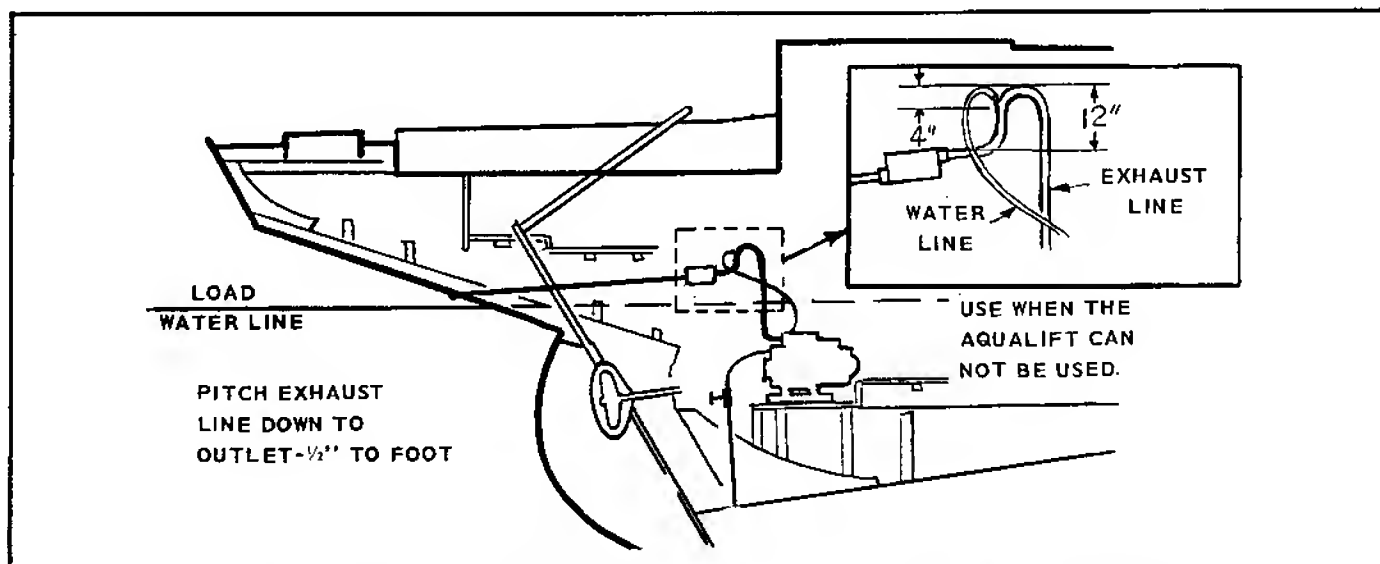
TYPICAL BELOW-WATER-LINE INSTALLATION, USING A RISER SYSTEM
